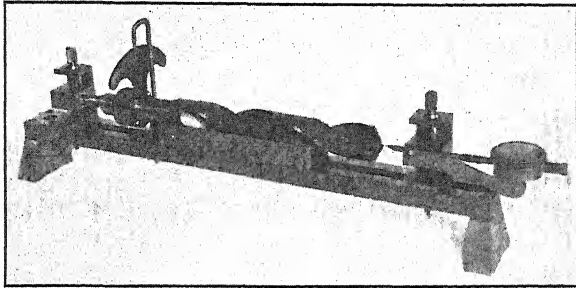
A Measuring Device to Check the Lead of the Cutting Edges of a Twist Drill.
